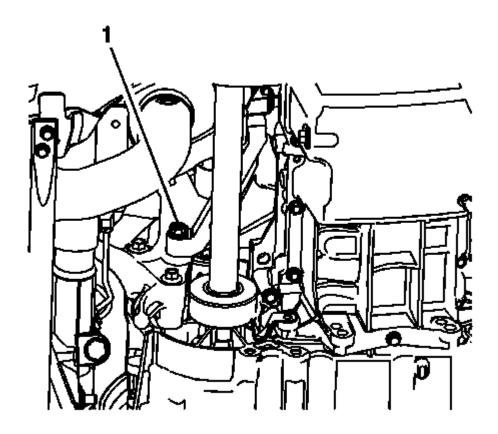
View of Fixed Timing Chain Guide Courtesy of GENERAL MOTORS COMPANY
